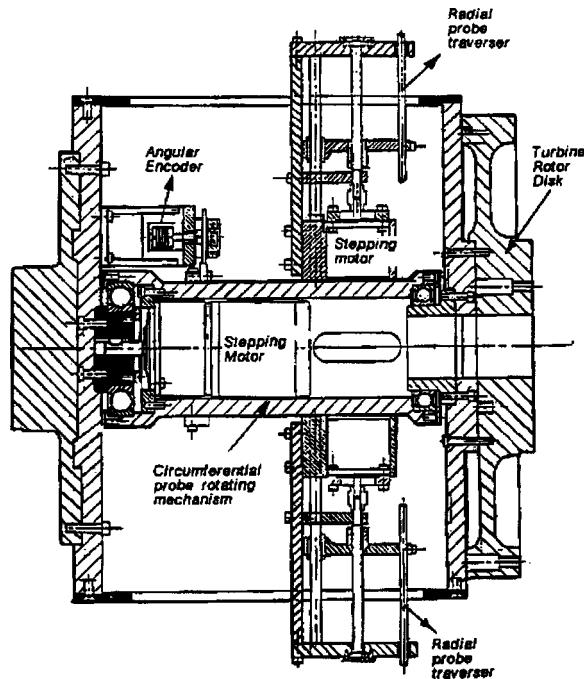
Rotating instrument and traversing package contained within the rotor drum
